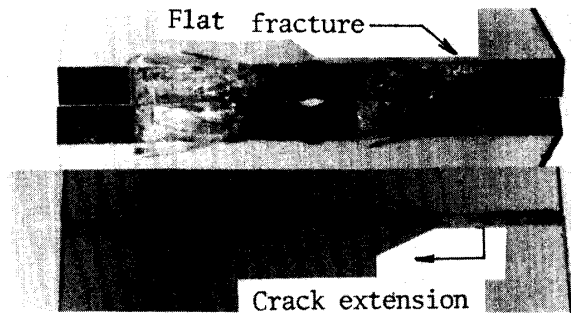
An Example of fracture surface of the hard polyvinyl chloride, the cracks initiated at the tip of right edge crack.
